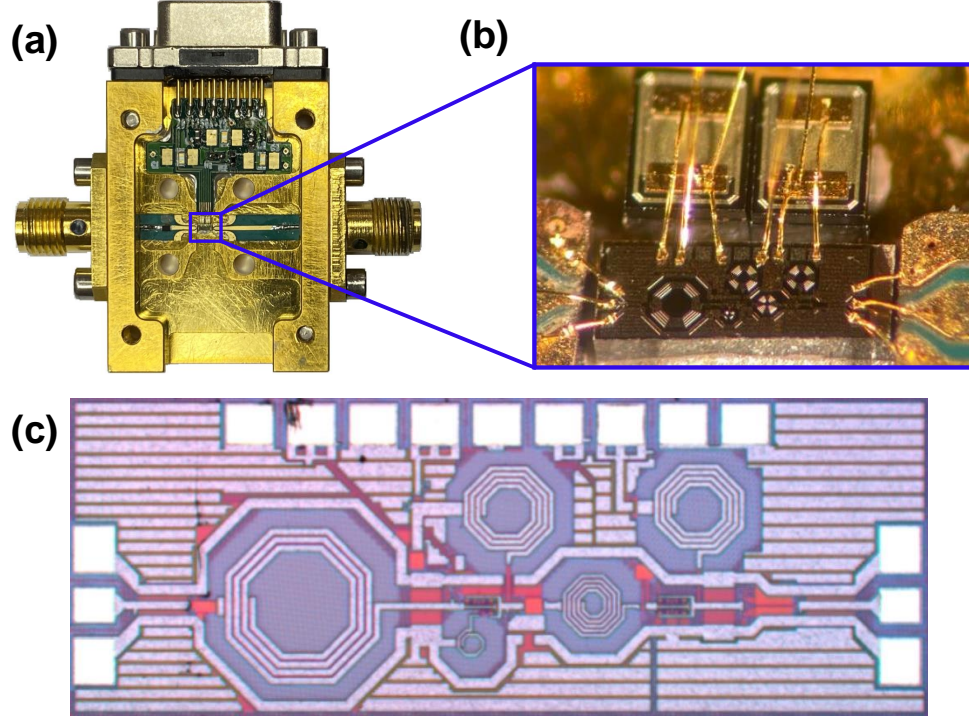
(a) Assembled module, (b) Wire-bonded chip, and (c) Chip photograph.
